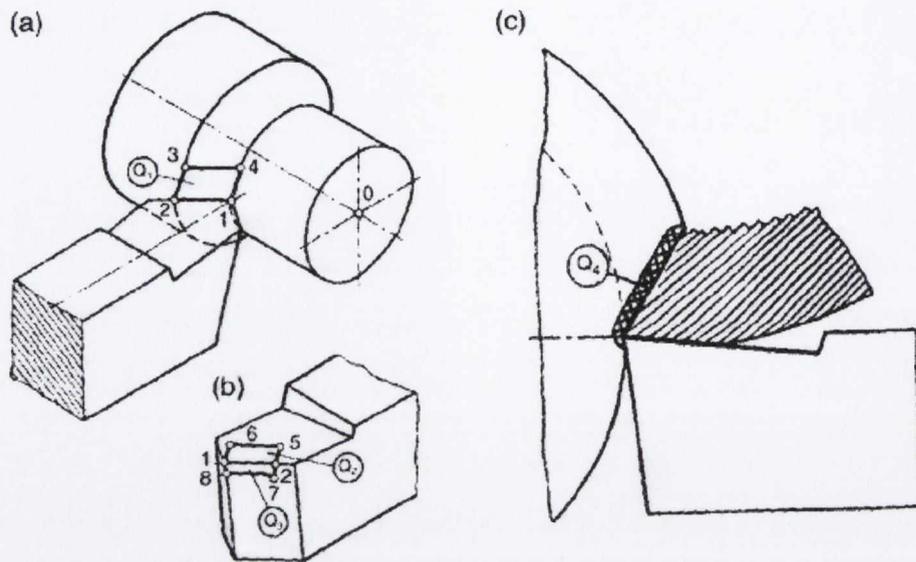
Machining sources of heat generation (Q) in metal cutting; (a) Q_1 due to intensive plastic deformation on the shear plane, 1-2-3-4, (b) Q_2 and Q_3 due to frictional heat at tool/chip interface, 1-2-5-6 and WP/tool flank, 1-2-7-8, respectively, (c) Q_4 due to interface heat transferred into WP. (Adapted from [128])
